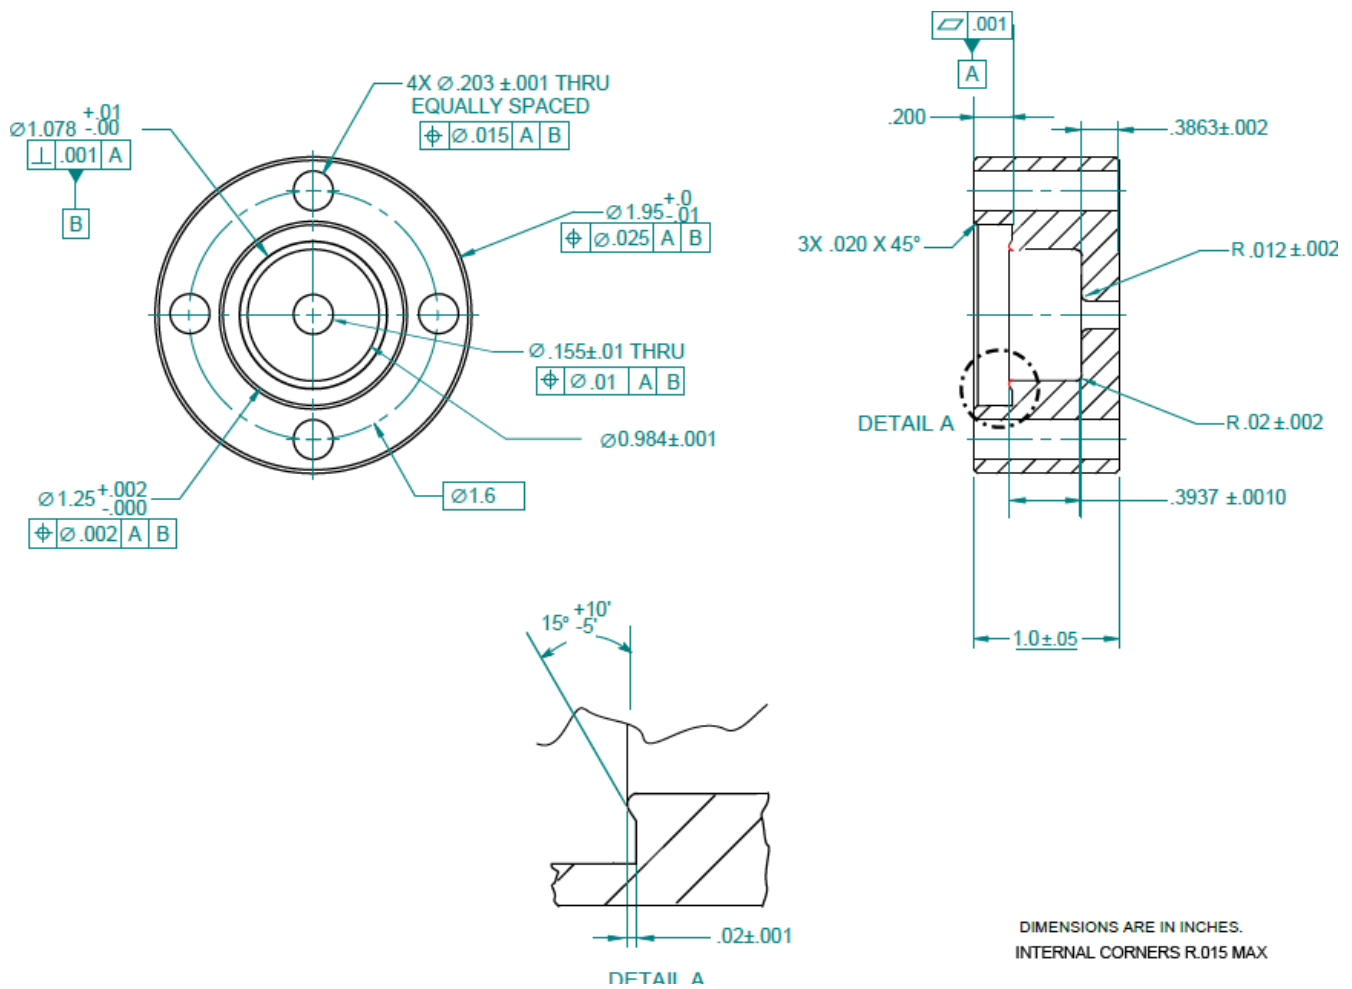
Mechanical drawing of the test cavity showing all dimensions and tolerances.
